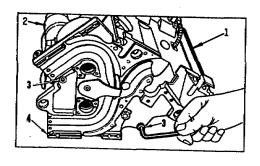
INSTALLING SOLENOID CABLE CONNECTOR.
